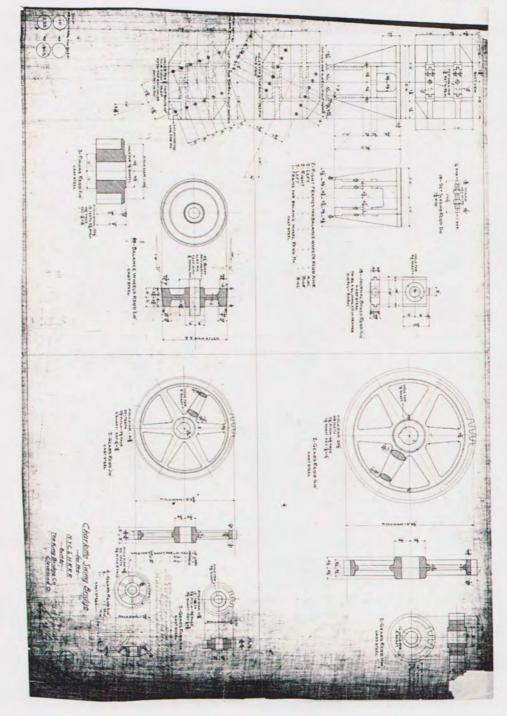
1904 blueprint by the King Bridge Company showing the pivot machinery design.
